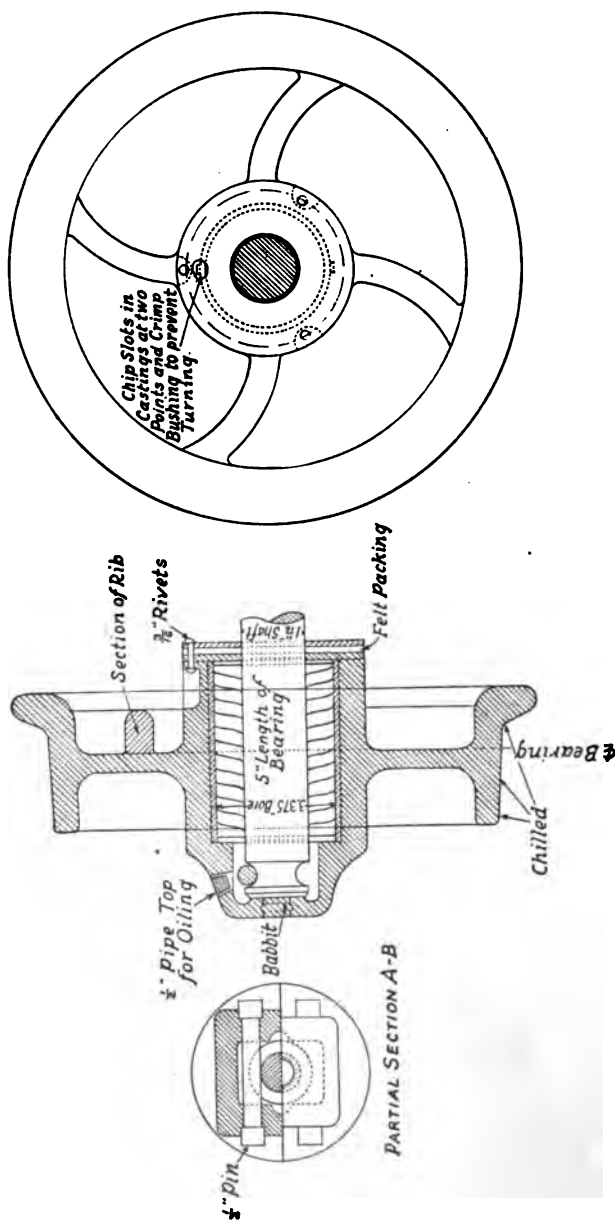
SEC. 106b.—Sectional and end view of Anaconda, 12" roller bearing, on car wheel.
